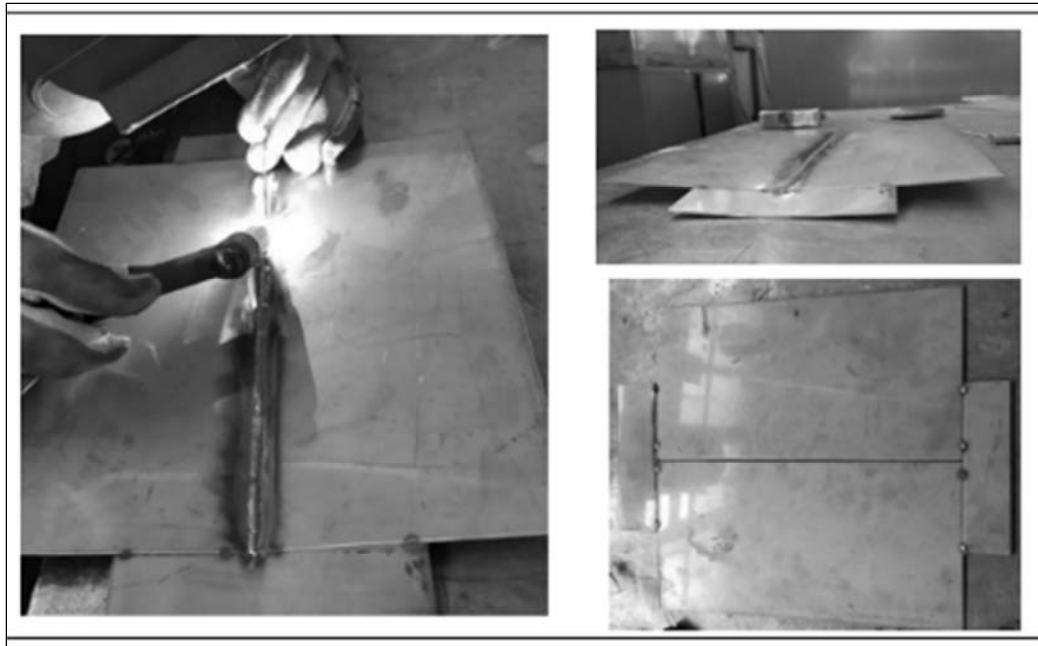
Pre-welding preparation, welding, and deformation after welding of sample 1
